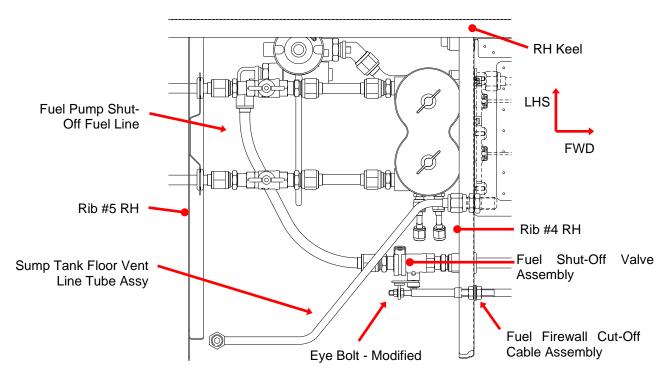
Sump Tank Floor Vent Line Tube Assy location – viewed from above (MK II fuel system shown, MK I fuel system similar, some detail is removed for clarity)
